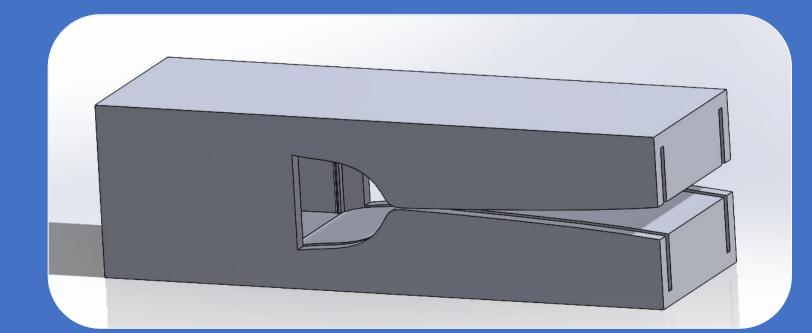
Final Nozzle Design (Rendered in SolidWorks)
